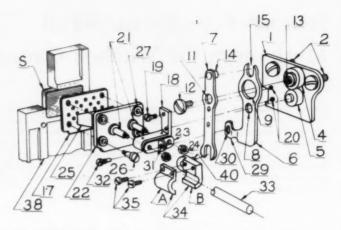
Exploded view of the working parts of the release-type pressure-pad system.
